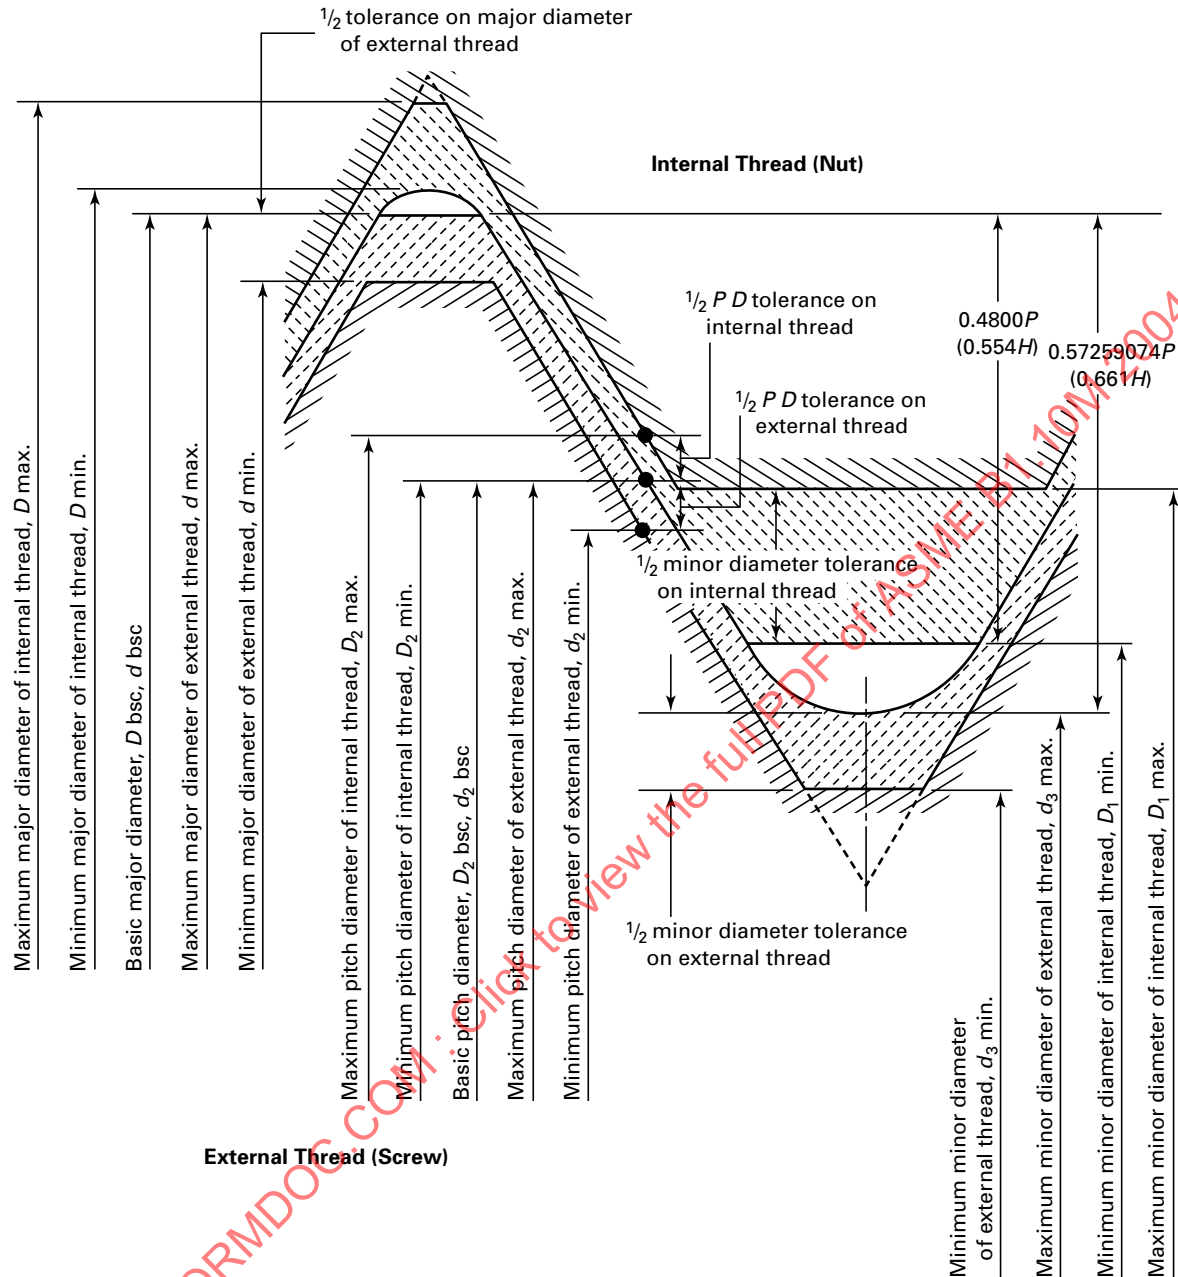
Disposition of Tolerances and Crest Clearances
